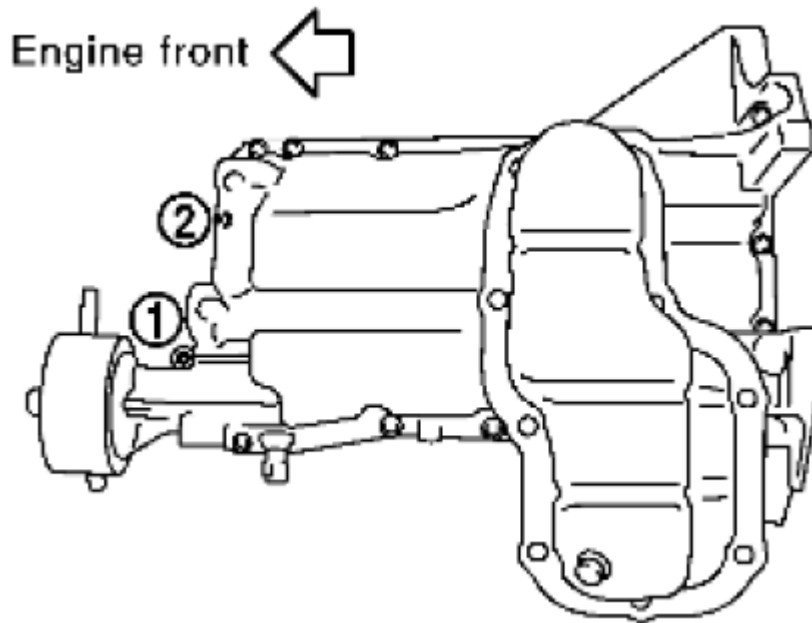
Identifying Oil Pan Bolts Loosen Sequence
